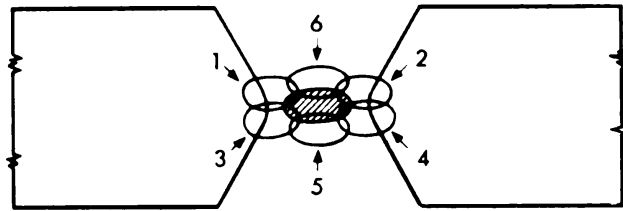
Back-up Methods for Welding Penetration Zone Root Beads on Homogeneous Armor Plate
